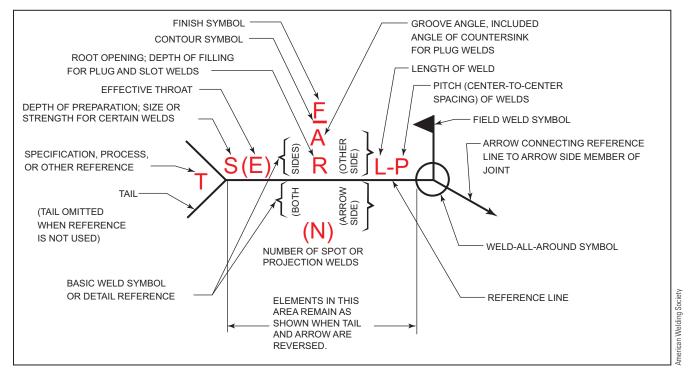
Standard location of elements of a welding symbol.
